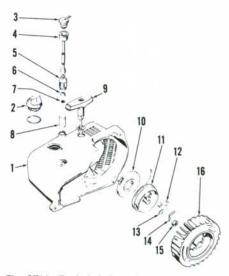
Exploded view of pawl type rewind starter used on some models. Starter housing (1) and fan housing are two separate parts on some models.
